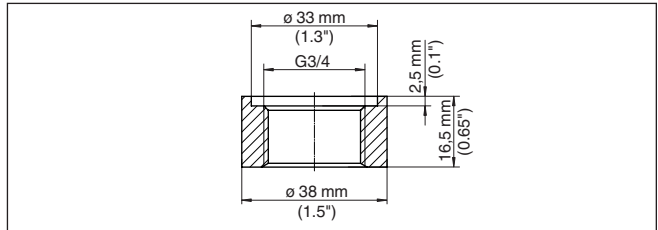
Dimensions of welded socket, thread G $\frac{3}{4}$  (DIN 3852-X)
